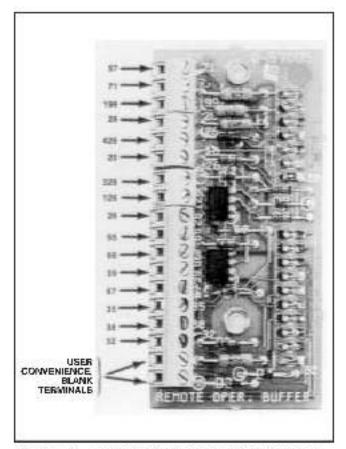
Remote Operator's Buffer Terminal Markings
